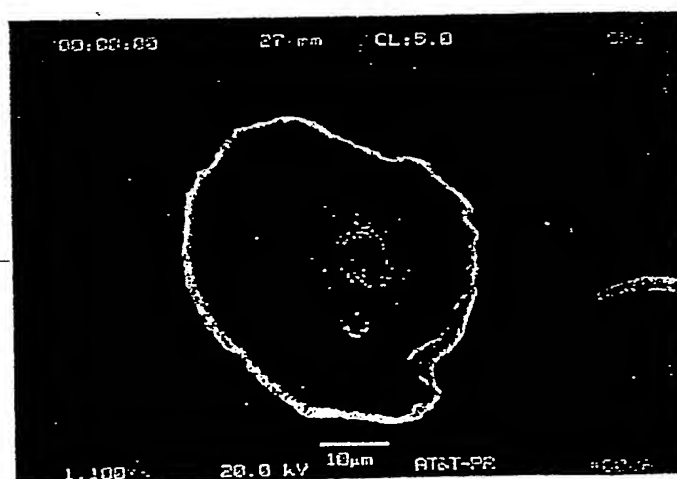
Aluminum deposit stuck on the destructively tested ball which was pushed out of the cavity shown in Figure 12.
